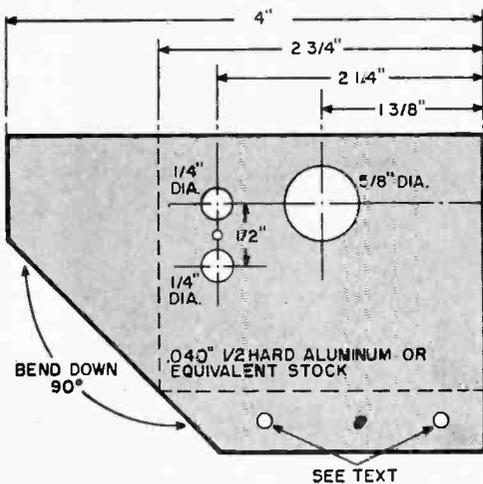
Dimensional diagram of the subchassis on which the 3A4 tube and crystal are mounted.
